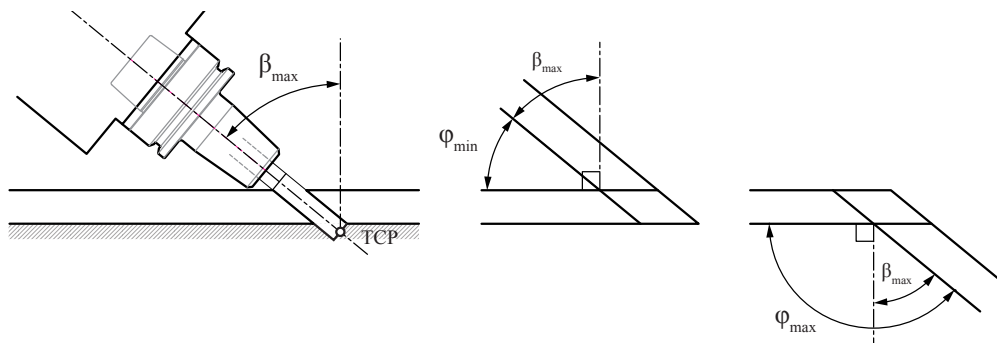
Fabrication Constraints. Side-cutting technique used for the automated fabrication of 1DOF edgewise joints with common 5-axis CNC routers. The maximum tool inclination  $\beta_{max}$  results from the tool and the tool holder geometry. From this we obtain the range of possible fold angles  $\pm\varphi$  between panels.
